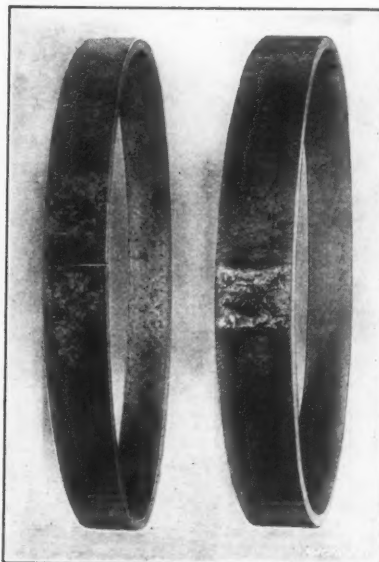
Example of Hoop-welding performed on Butt-welding Machine shown in Fig. 3—Toledo Electric Welder Co.
